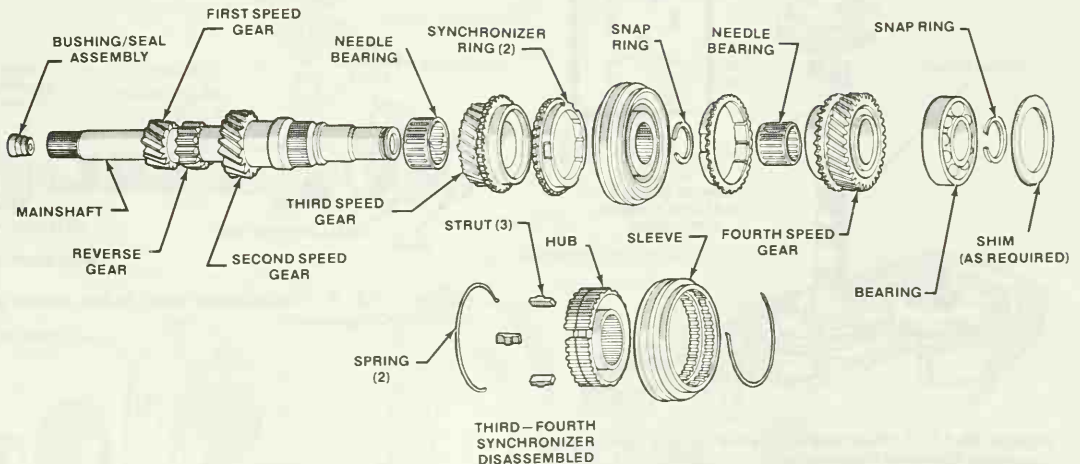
A disassembled view of a mainshaft assembly. (Chrysler Corporation)
